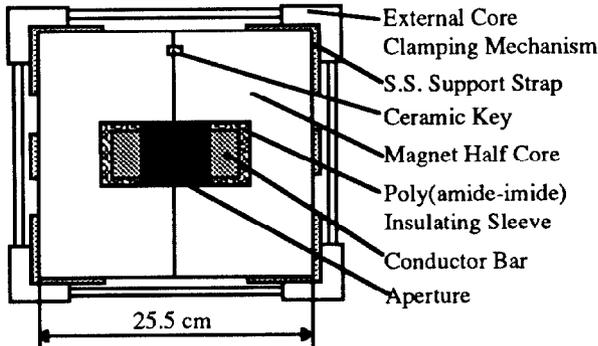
Schematic cross section view of Single Turn dipole (water cooling and coil tie rod details omitted for clarity)
